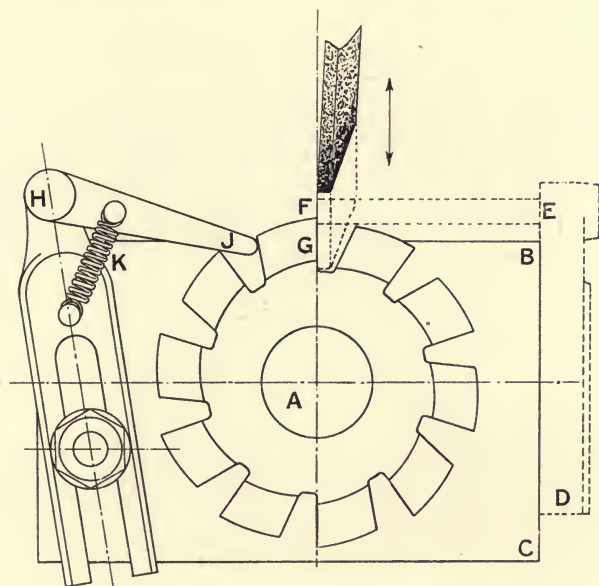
SETTING FORMED CUTTERS FOR SHARPENING
